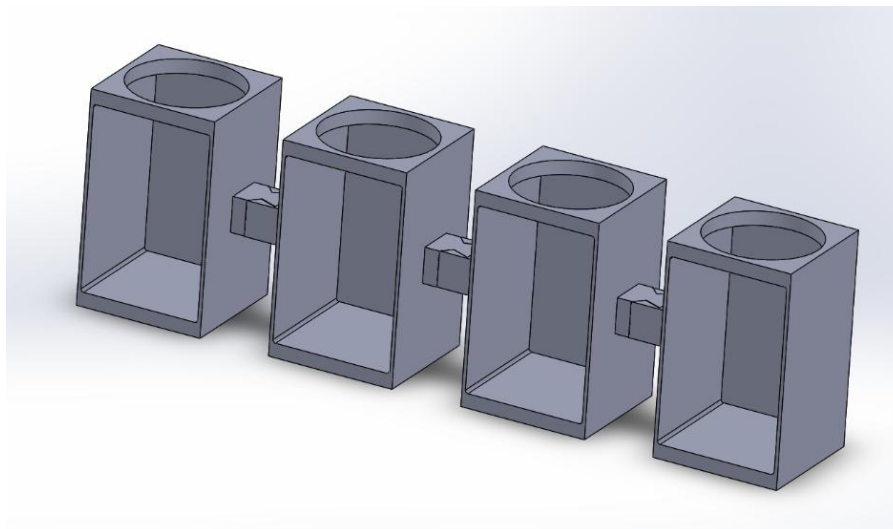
Assembly of reservoir holder parts made in SOLIDWORKS.
